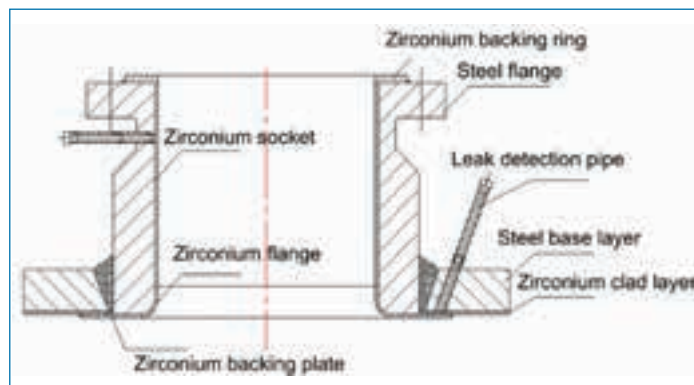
The welding scheme of the connecting pipe of large diameter to the cylinder.
